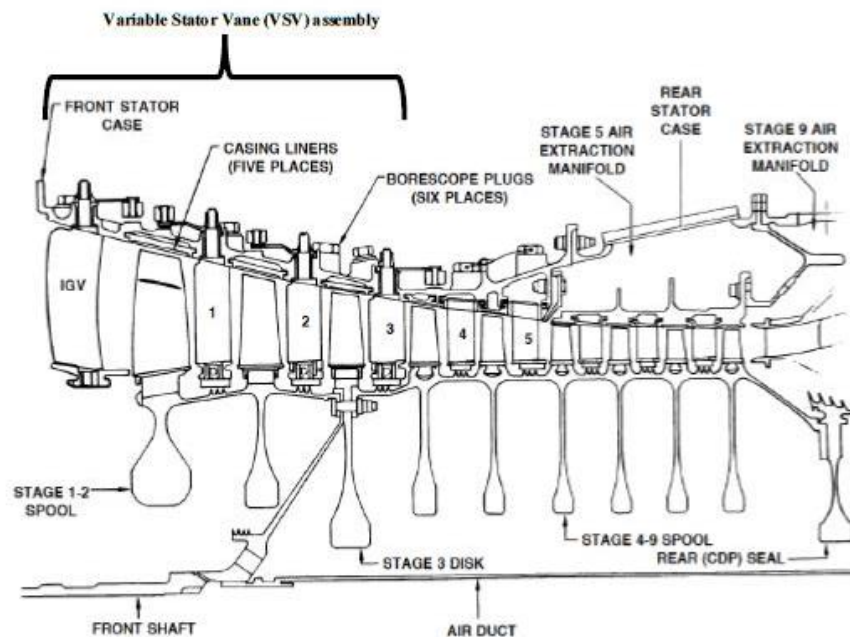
Outline of compressor sections in the CFM56-5A [42].
